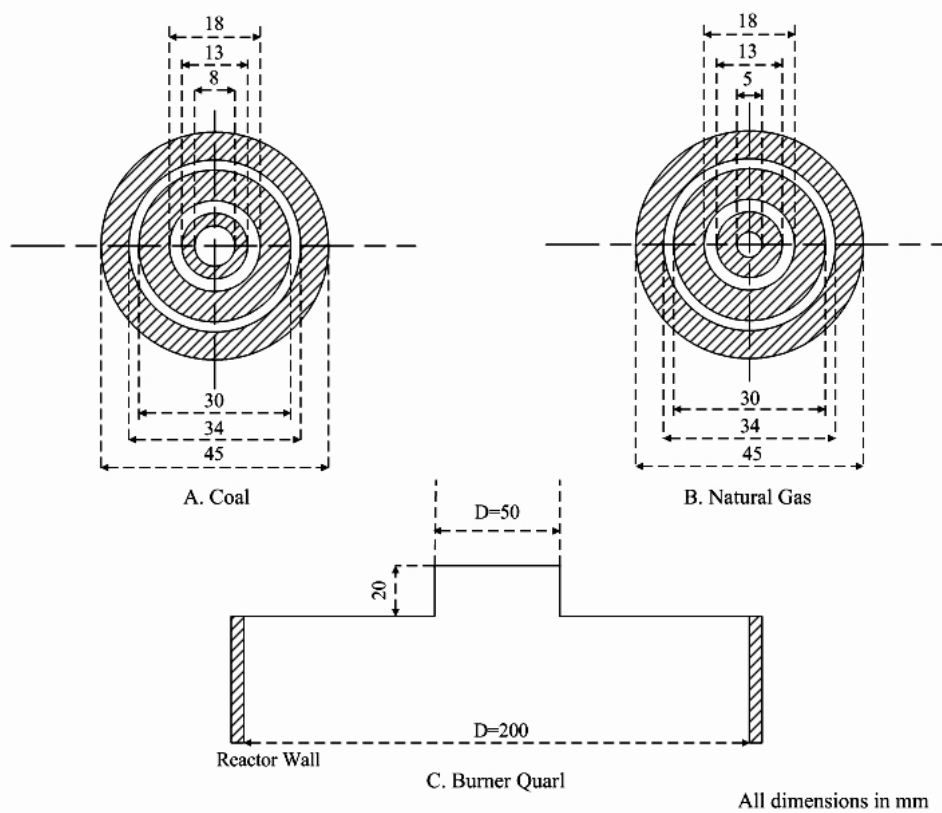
Dimension of the burner openings (A) for coal combustion, (B) for natural gas combustion and (C) burner quarl.
